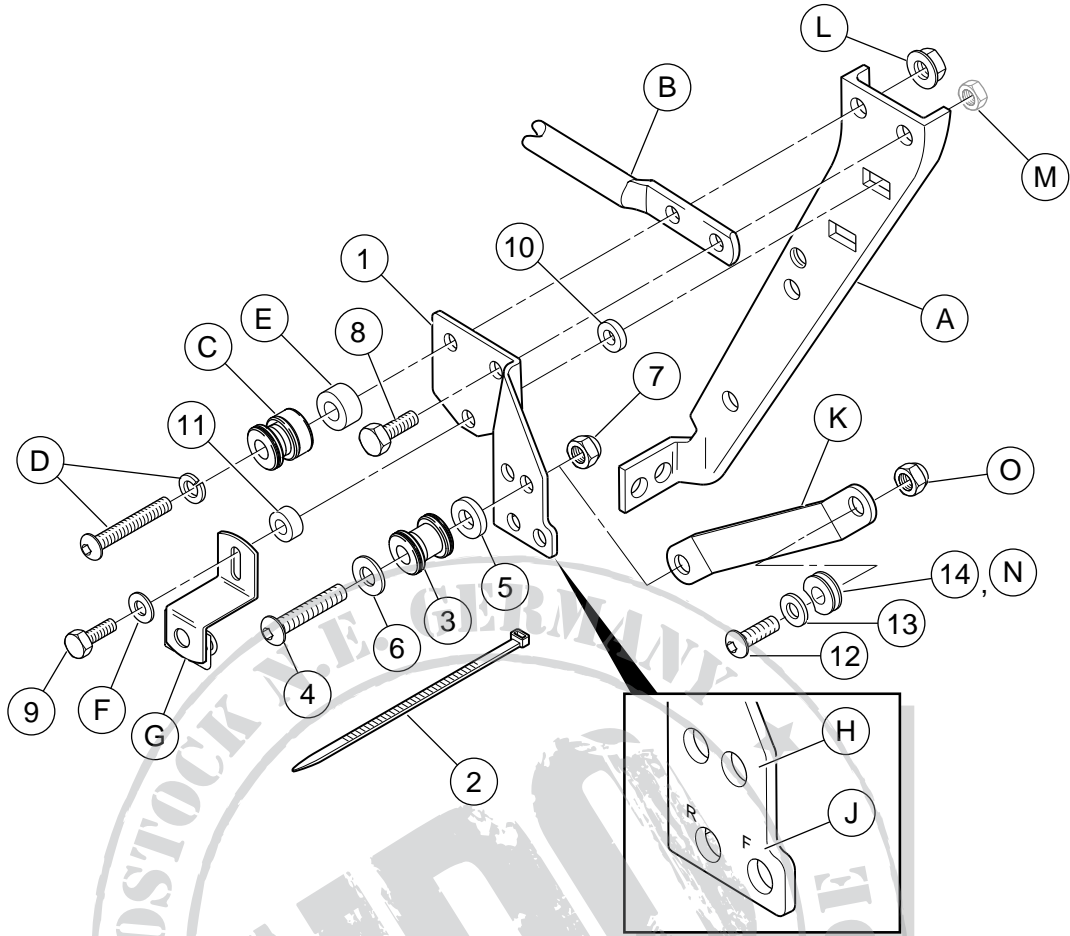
Service Parts: Front Docking Kit Installed with Rear Docking Kit (53804-06)
